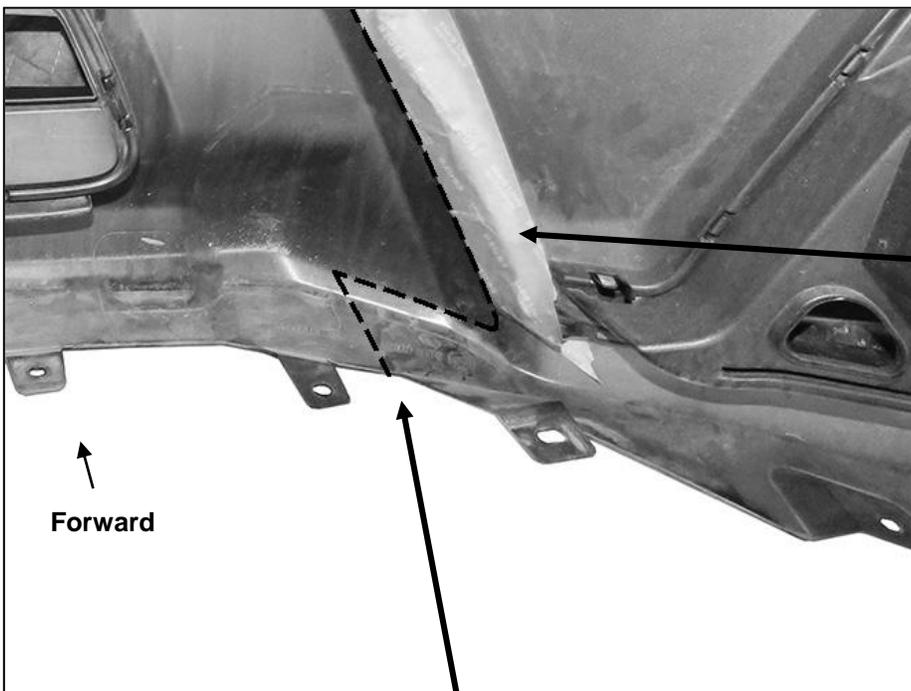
Locate indented trim line (arrows) running from side to side of bumper. Passenger/right side pictured, duplicate on driver/left side
